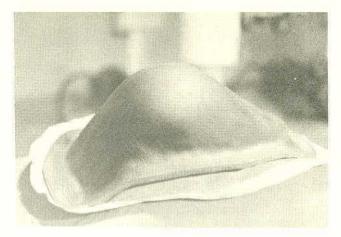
Polyethylene foam and vinyl shown formed over walnut shell mold.
